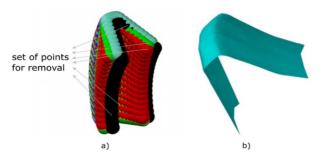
Generation of tooth gearing by a) points, b) surfaces made through points
